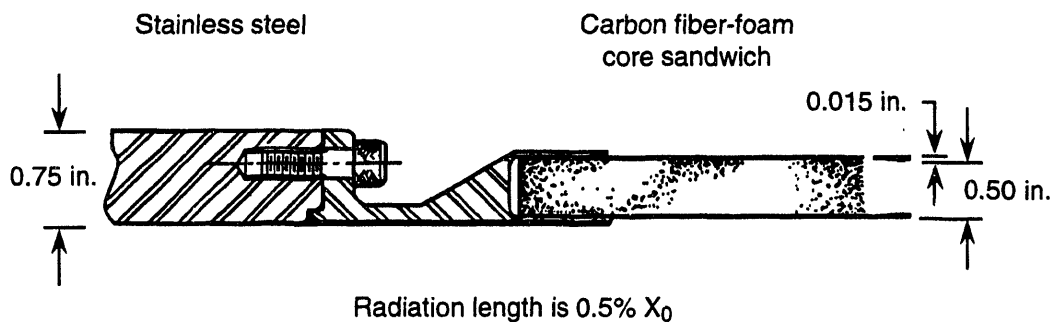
Detail of joint between the thin inner section of the support barrel and the outer stainless-steel section.
